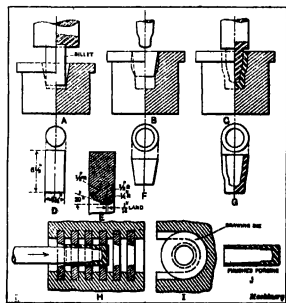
Diagram illustrating Calley process of making shrapnel forgings in hydraulic forging process.
